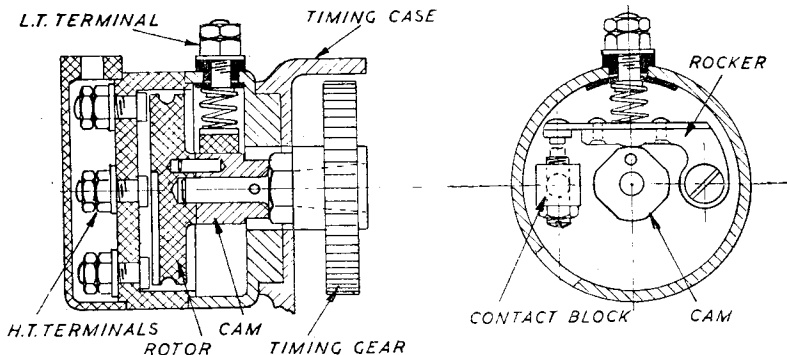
Section of distributor assembly, showing arrangement of unit on timing case, and face view of contact-breaker
